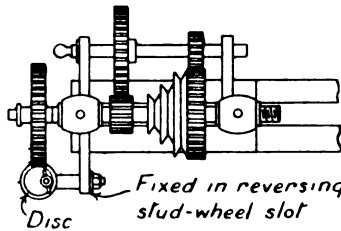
SHOWING DIVIDING ATTACHMENT ON LATHE.
